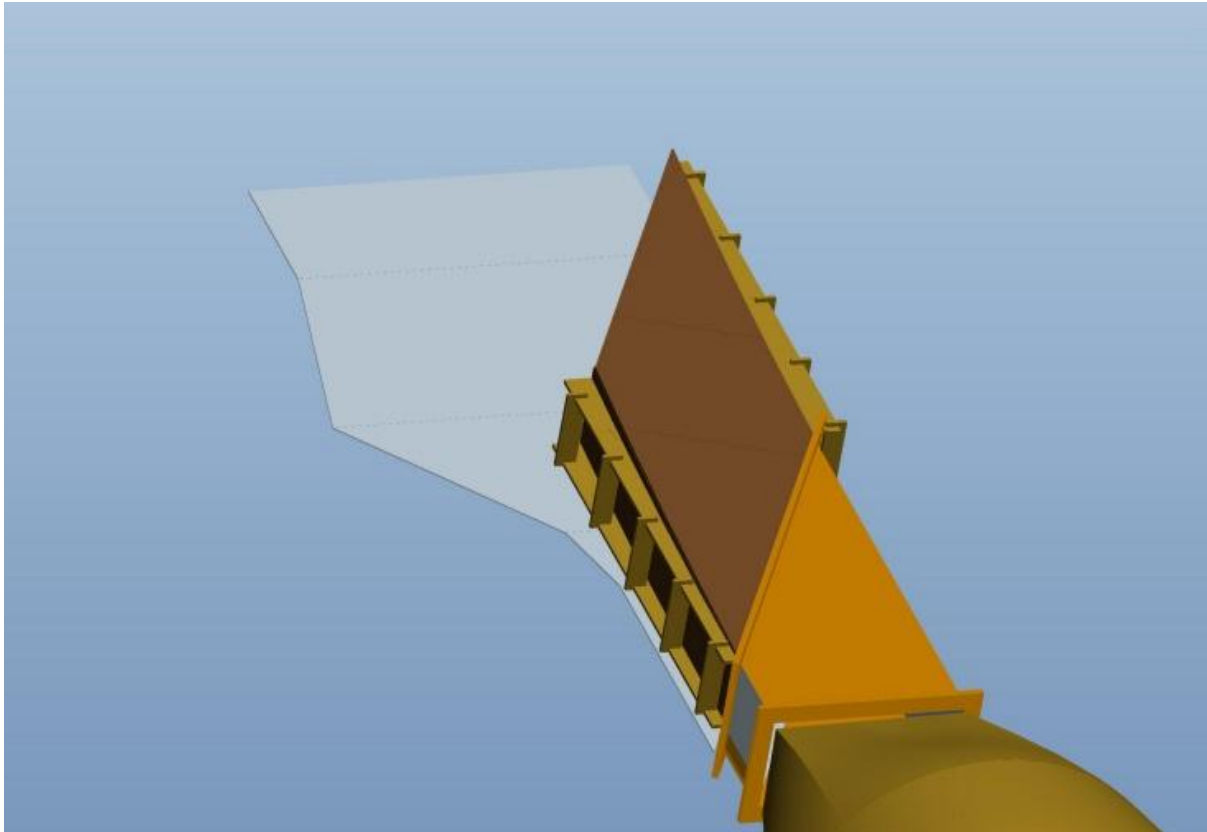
Assembled CAD model of diverging section fitted to tunnel
